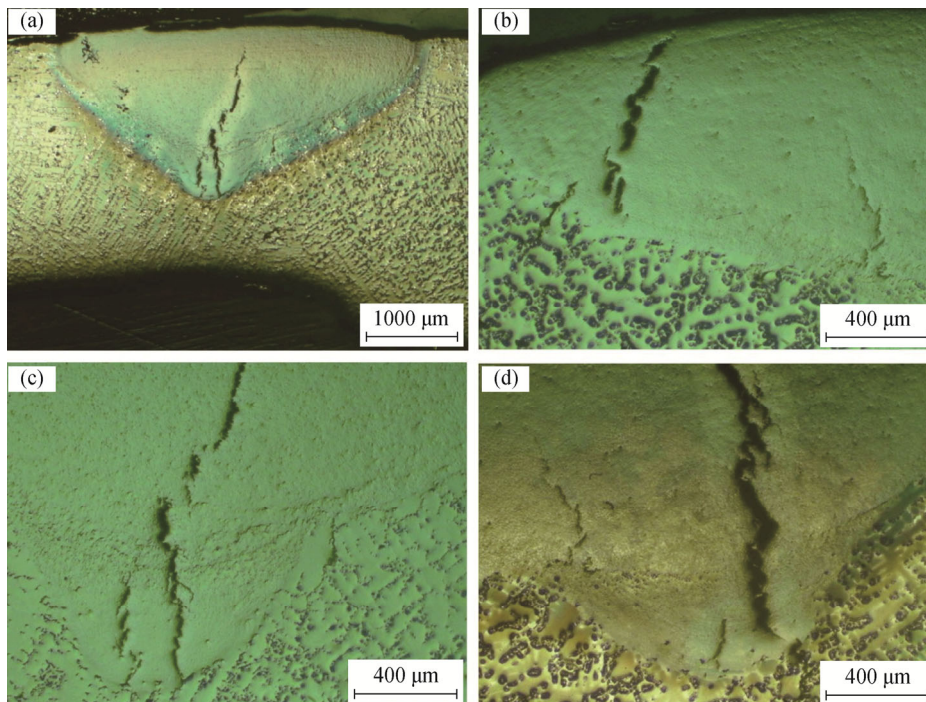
Optical microscopy images of the first cross section (a, c), the second cross section (b), and the third cross section (d) of the welded part which formed liquation cracks during the first heat-treatment cycle.
